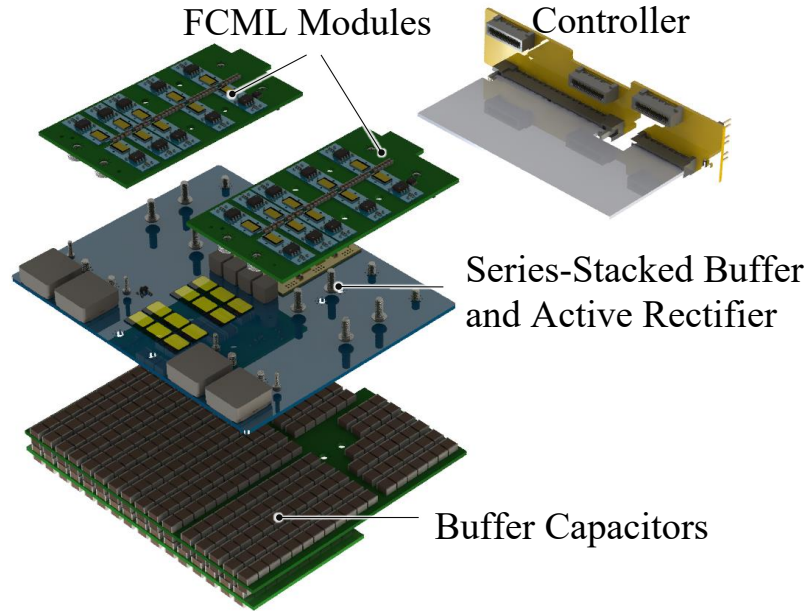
Exploded view render of the electric vehicle charger assembly.
